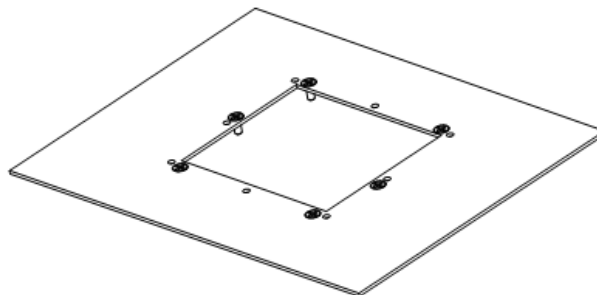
VM800B 3.5" Panel Mount Dimensions
